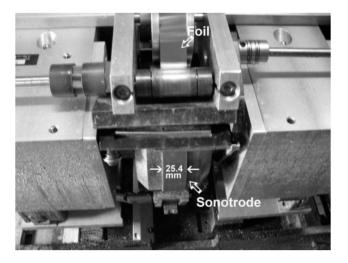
Close-up view of the Welding head, showing the sonotrode from below (as shown in [3])
